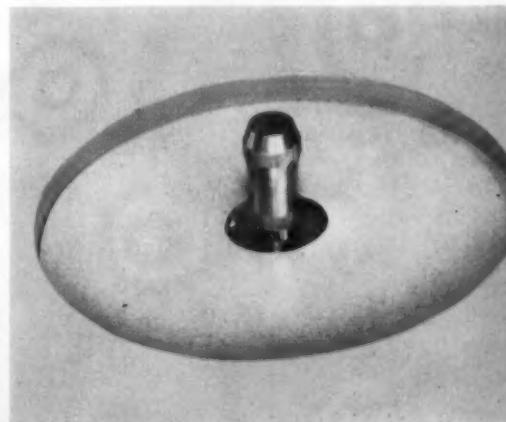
A vertical type cylindrical die machine arranged to automatically lower and raise the part for ease in handling.
